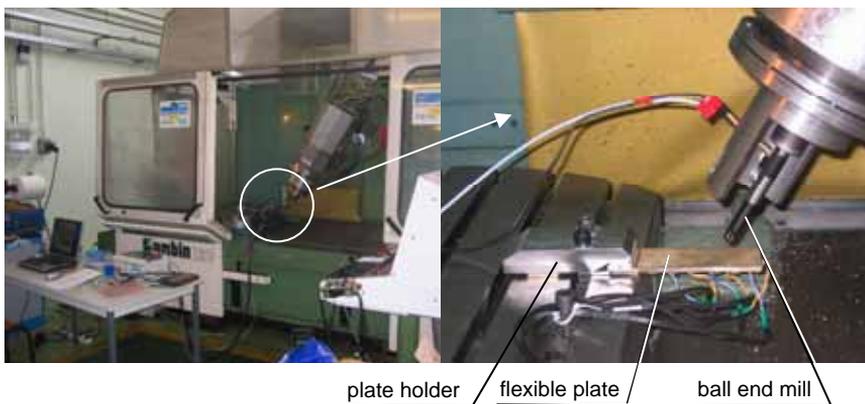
View of a slender ball end milling of one-side-supported flexible plate.
